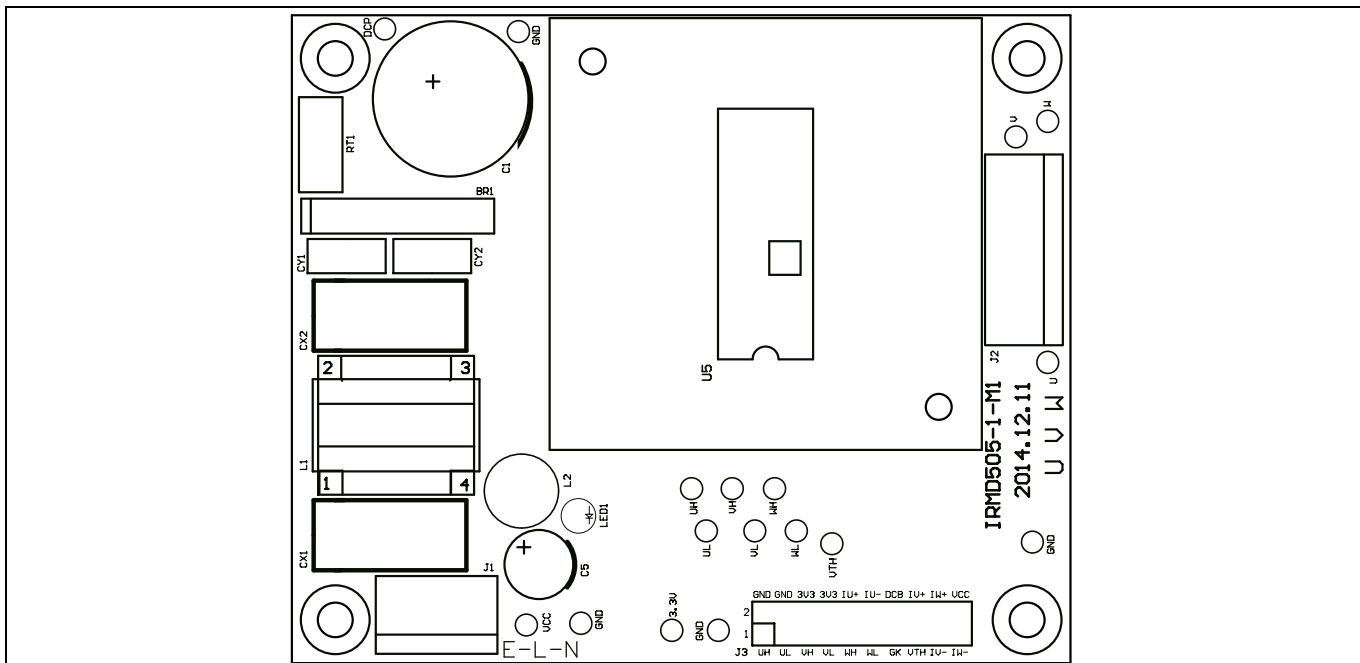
Top assembly print of the EVAL-M1-05-84D evaluation board
